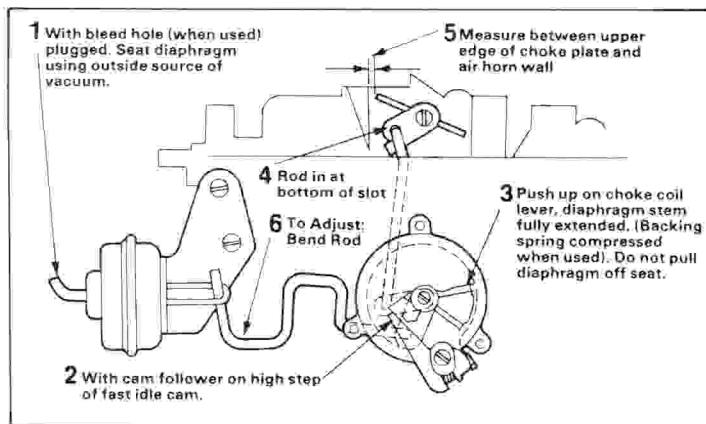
VACUUM BREAK ADJUSTMENT (Rear)
